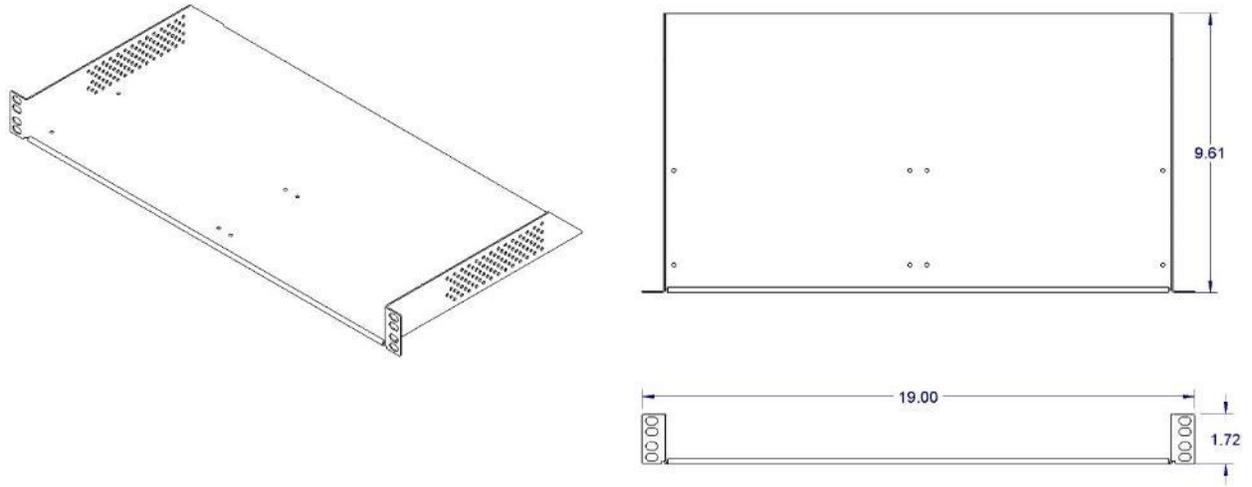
EX14XX-RK001RACK MOUNT KIT (inches)
